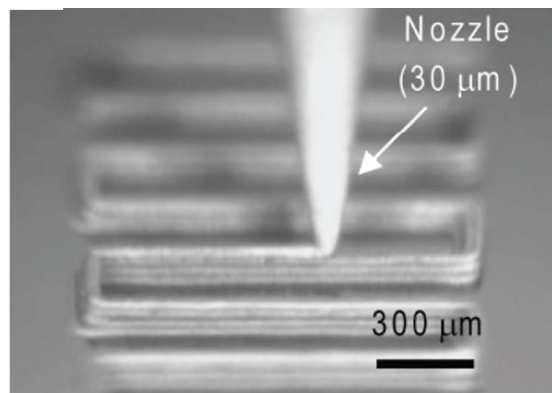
View of a paste extrusion system [53]. Reprinted with permission.
